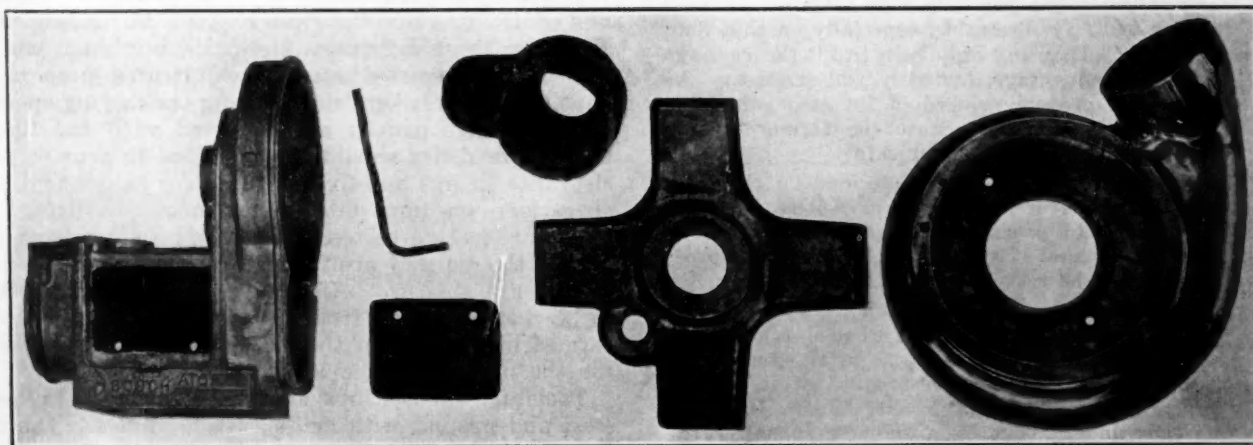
MAGNETO HOUSING, STEERING-WHEEL HUB AND FAN HOUSING, ALL DIE-CAST
